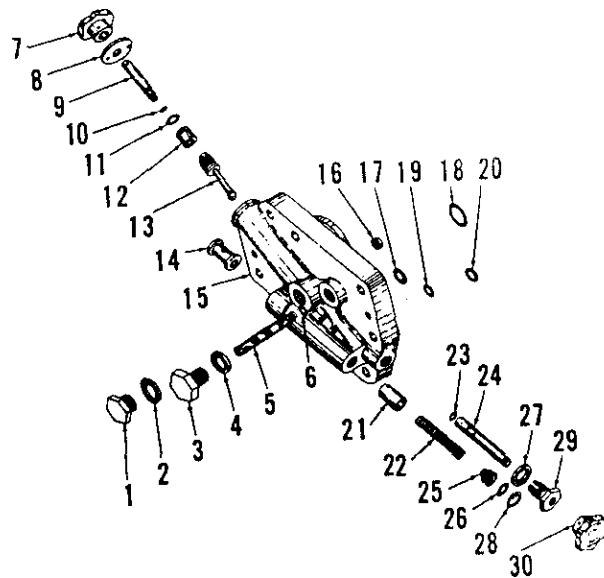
Control valve assembly and draft plunger linkage after removal from hydraulic lift housing.
